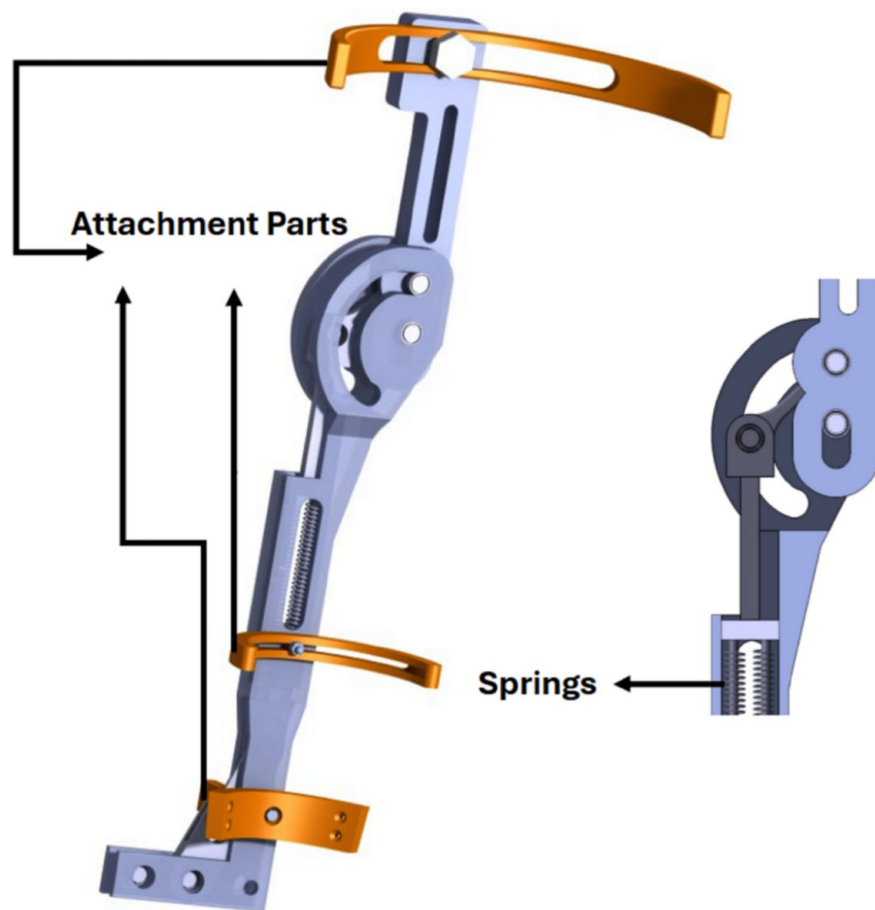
CAD model of the KneExo (left), braces are implemented to fit the KneExo to the lower limb, and the springs are placed inside the shank part (right)
